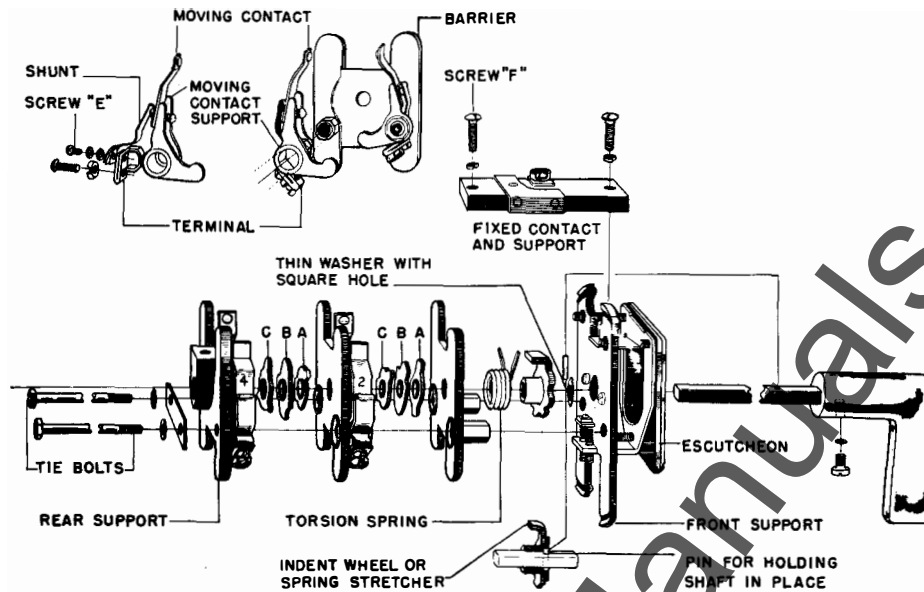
(8009283) Exploded View of Contact Section of Type HEA Relay
